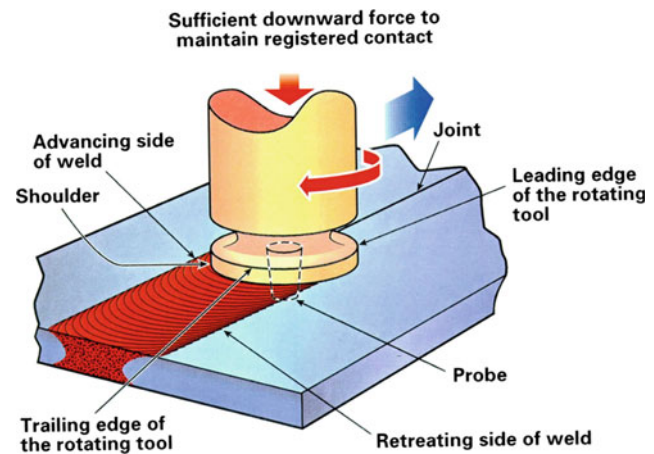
Schematic drawing of friction stir welding
